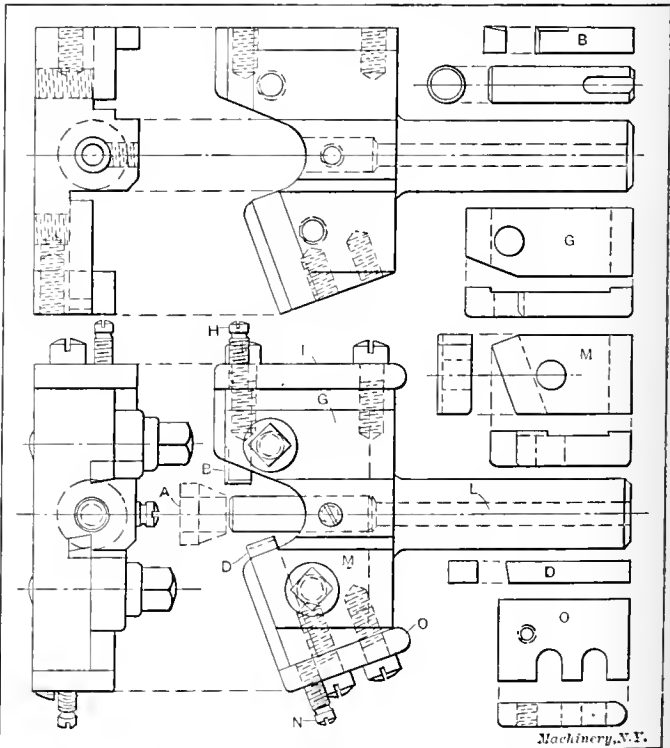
Box-tool for Finishing Treadle-rod Cone
